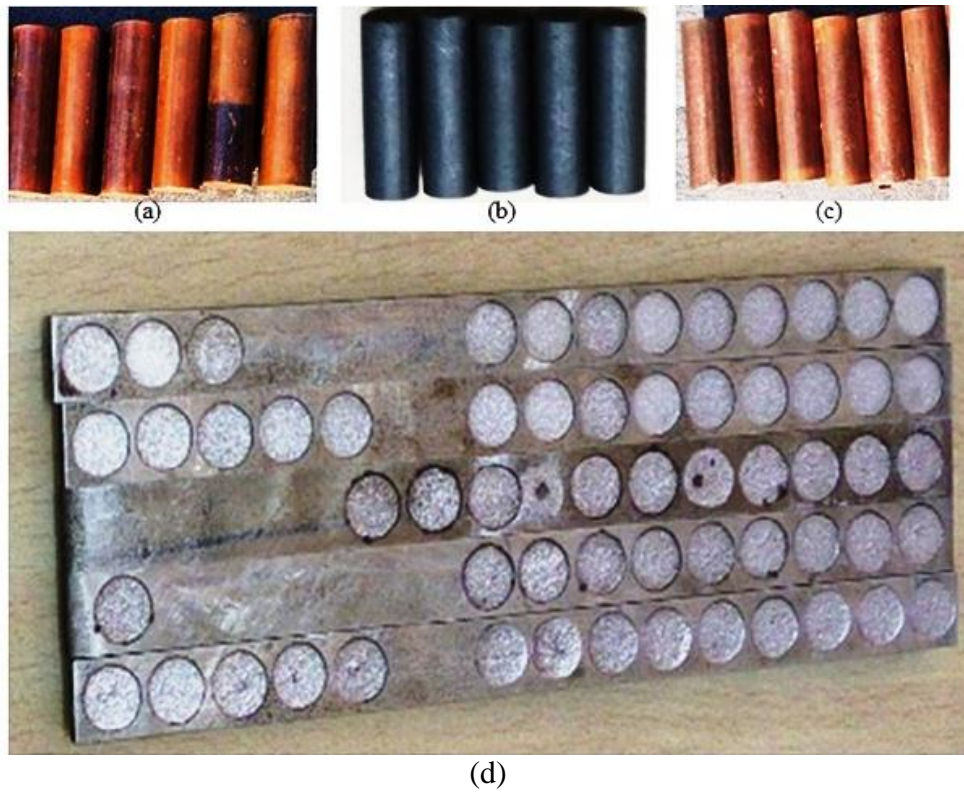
Tool electrodes of (a) copper-chromium, (b) graphite and;(c) copper. (d) Inconel-800 workpiecesafter machining.
